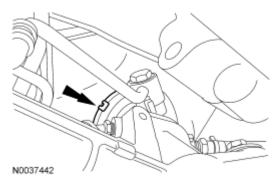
Locating Power Steering Pressure (PSP) Tube Courtesy of FORD MOTOR CO.
